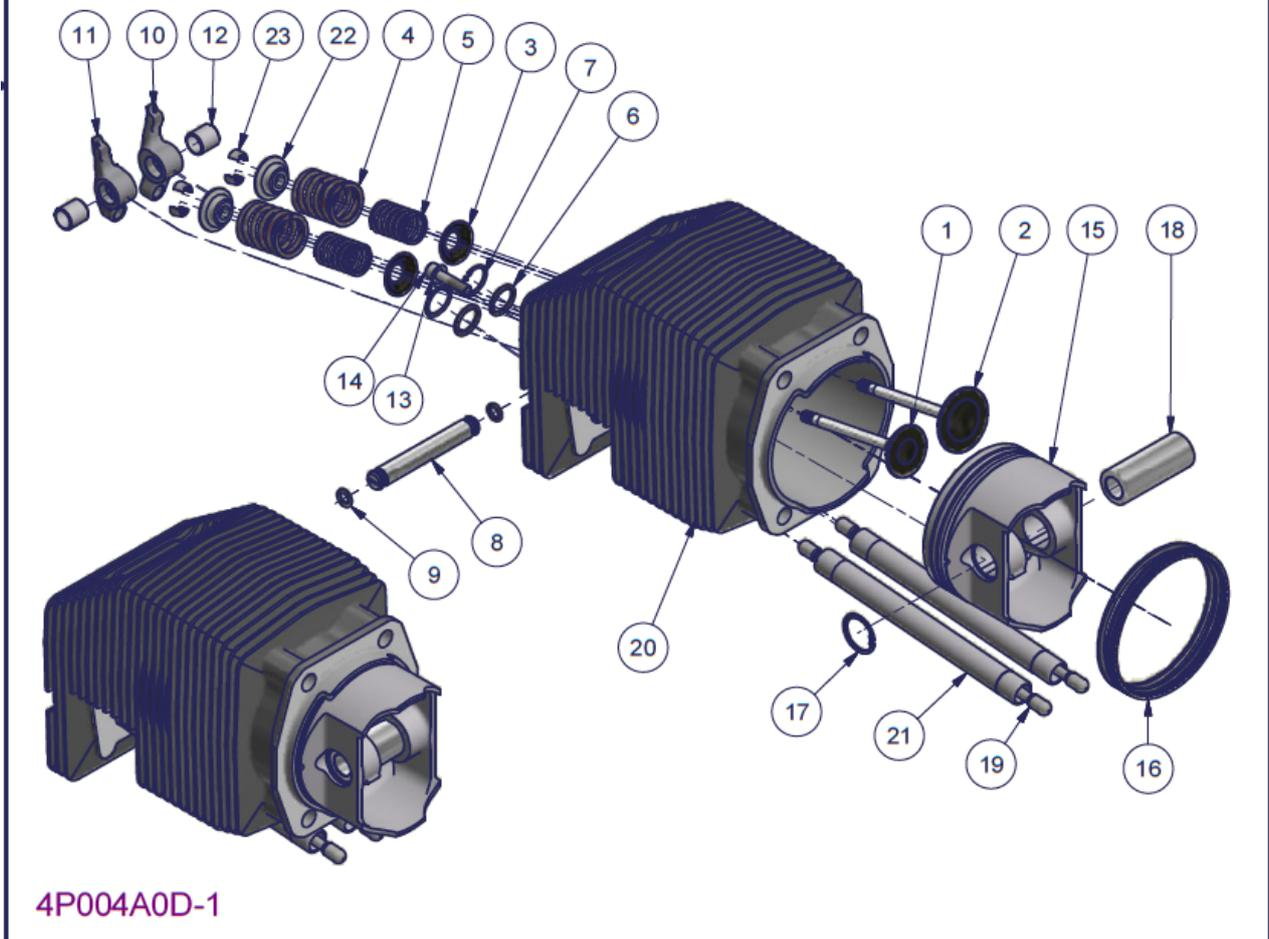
2200/3300 Cylinder subassembly - Parts list
